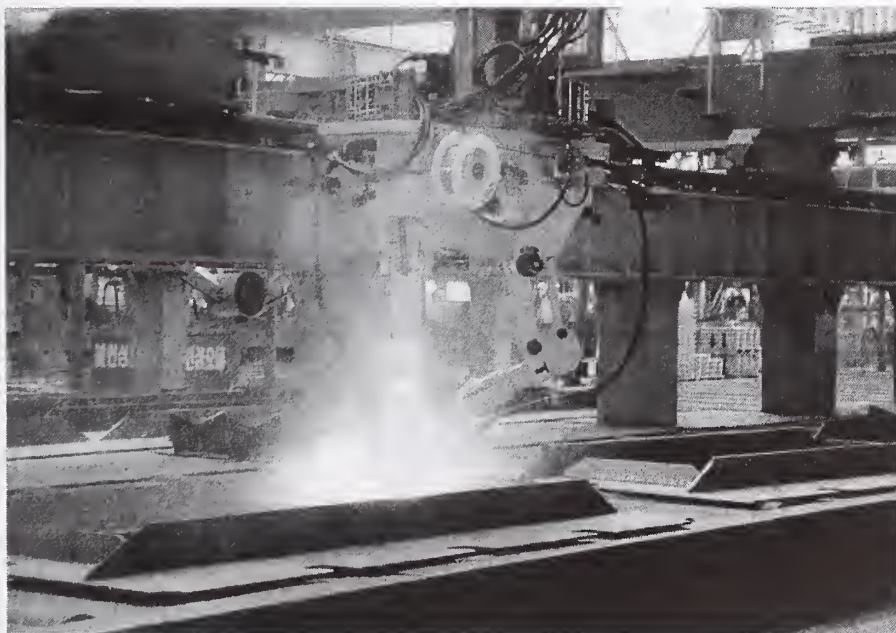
Photograph of automatic welding system for stiffeners
